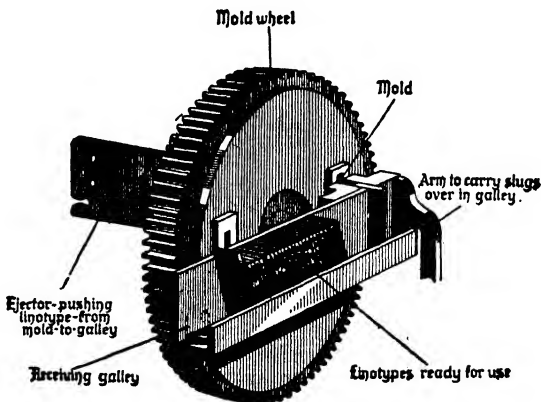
MOLD WHEEL OF LINOTYPE MACHINE.
